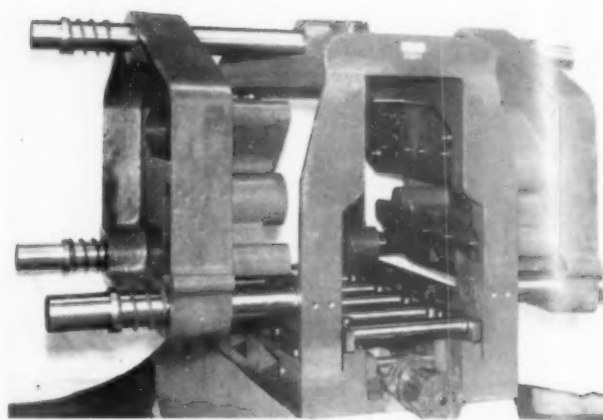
, at right, a special air-operated fixture designed with a traveling bushing plate on each side and used for drilling various size holes in the sides of Diesel engine cylinder blocks. The work comes to this fixture along a roller conveyor, a section of which is part of the fixture. This section of the conveyor is raised to the level of the conveyor on incoming and outgoing sides by means of cams which are actuated by an air-cylinder. After the work is loaded into the fixture, the air is exhausted from the cylinder, thus allowing the work to be lowered over locator pins and rest-plates while drilling takes place. The work is held in position by an air-operated clamp. Both photos by courtesy of Hoefler Manufacturing Company.
